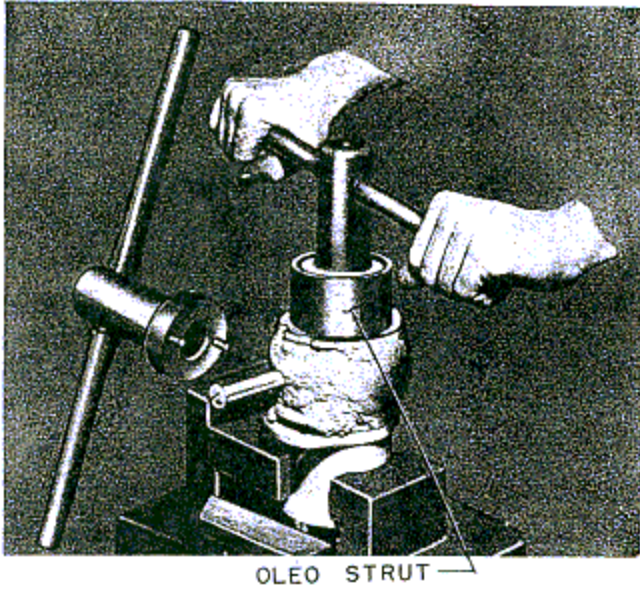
Plunger Assembly Installation Spanner Wrench, P-15765
